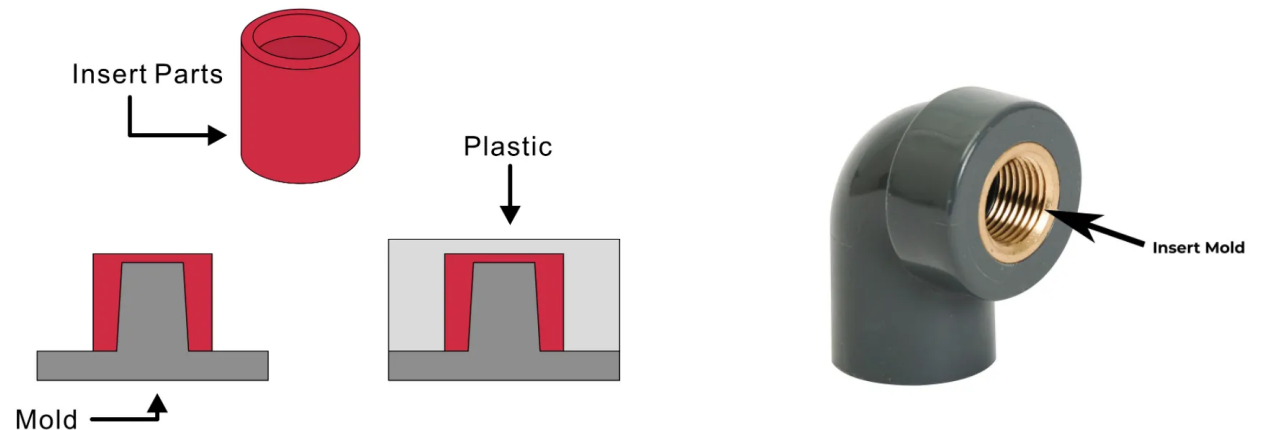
Inserts can be directly moulded into the plastic part by placing inserts onto pins in the mould. (Source: <https://tymagnets.com/insert-molding/>)
